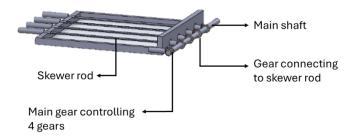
The Solidworks illustration depicts an assembly of four steel rods connected to individual gears, controlled by a main gear, forming a mechanism for the four-skewer setup.
